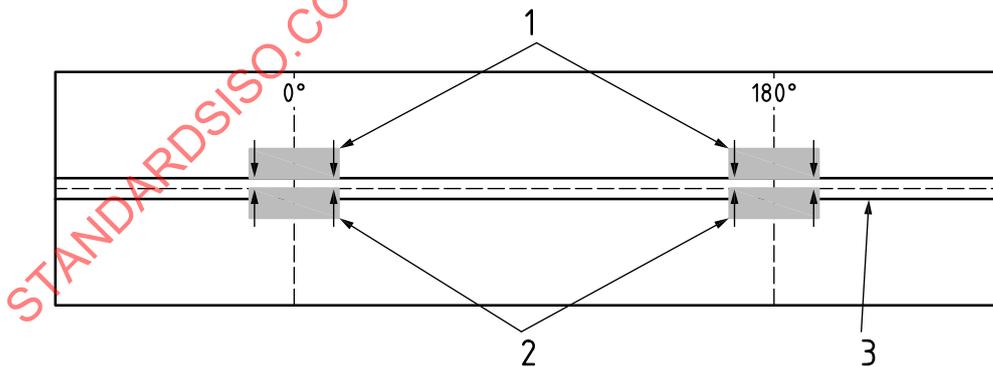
Expanded view of the pipe specimen showing the location of the two metallographic sections to be taken from a seam welded pipe
